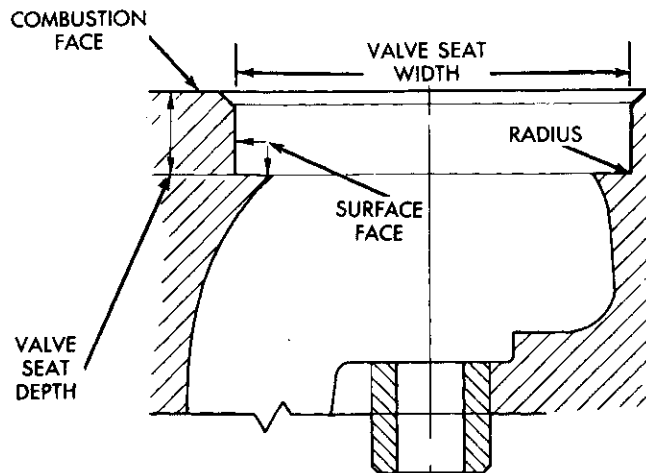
Grind Valve SeatSERVICE VALVE SEAT INSTALLATION
